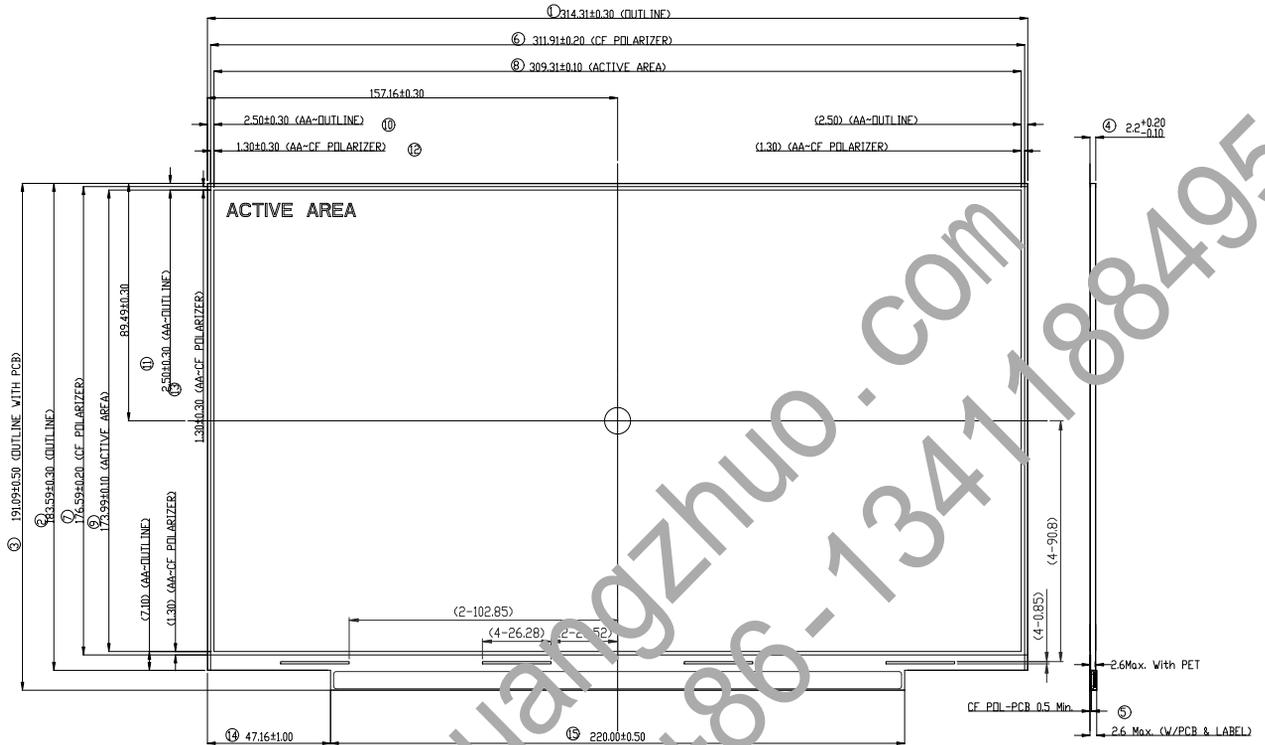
TTT-LCD Module Outline Dimension (Front View)
